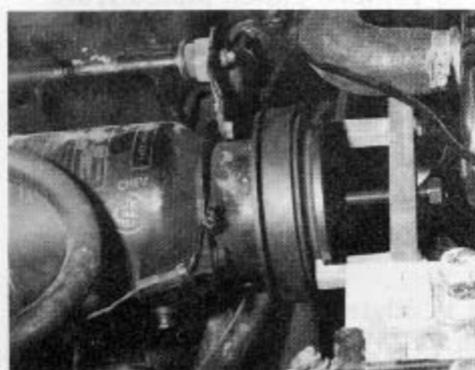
Remove pulley and bearing from compressor crankshaft with suitable type puller.
